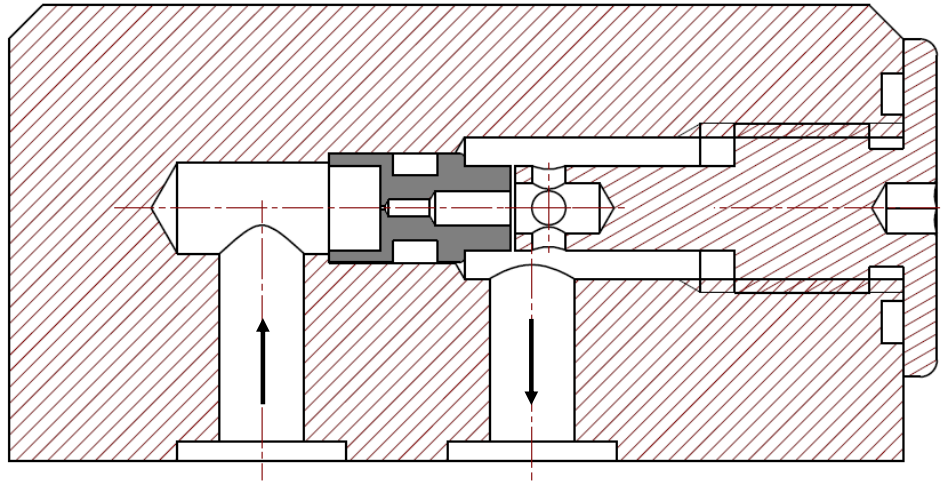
Cross sectional view of fixed orifice test assembly
